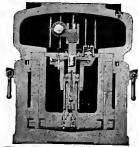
Low Туре Telescope Hydraulic Jack. Duff Manufacturing Company.
